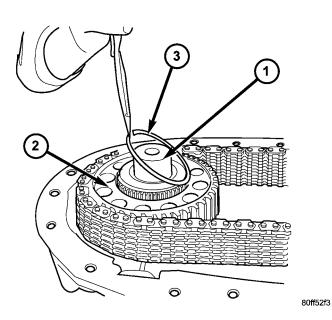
Install Front Output Shaft Sprocket Retaining Ring
